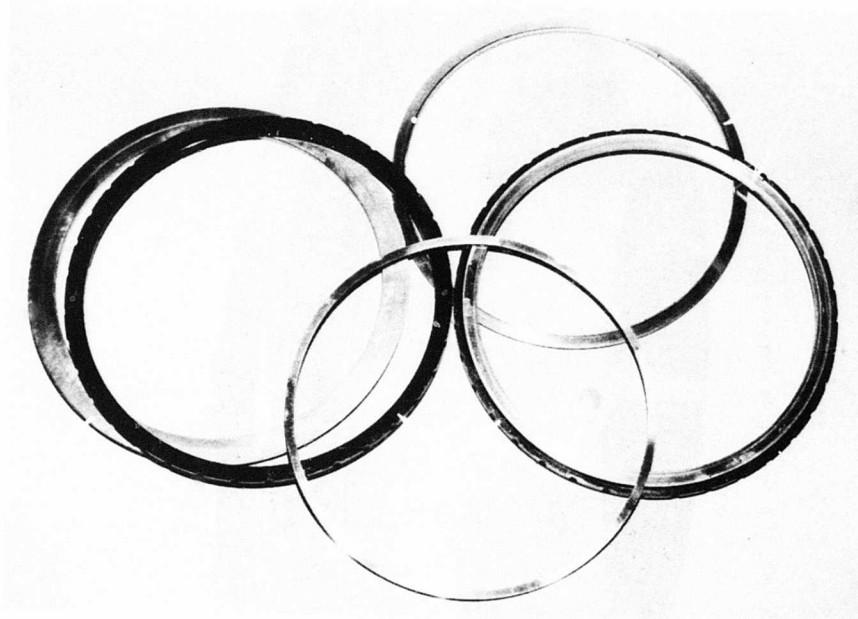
Regenerator I.D. Seal, Split One-Piece Conically Sprung Ring Seals Disassembled, Showing (1) Untapered Seal Plate, (2) Conical Carbons, (3) Wavy Spring Washer, and (4) Thrust Plates.
